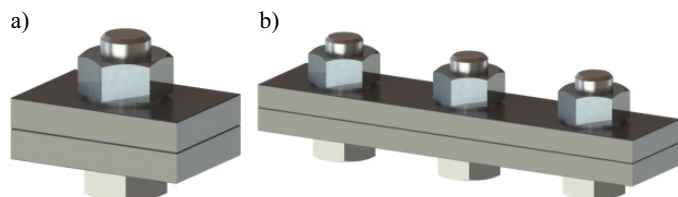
(a) Single bolted joint, (b) Triple bolted joint.
